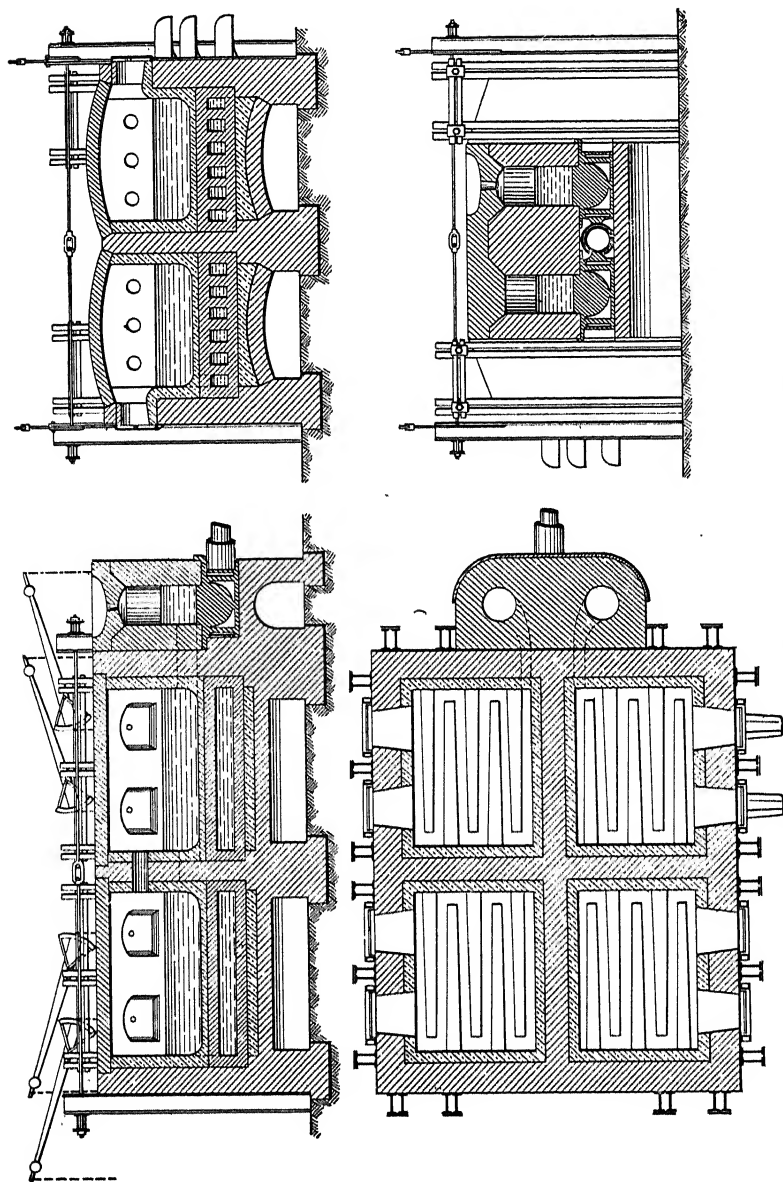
SECTIONAL ELEVATIONS AND PLAN OF GIN'S CHAMBER FURNACE.
